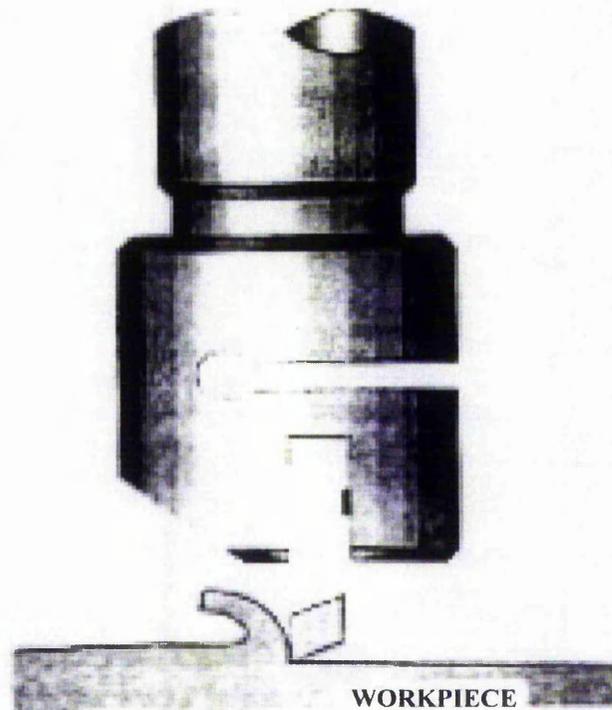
Non-rotational cutting tool mounted at the main spindle.
